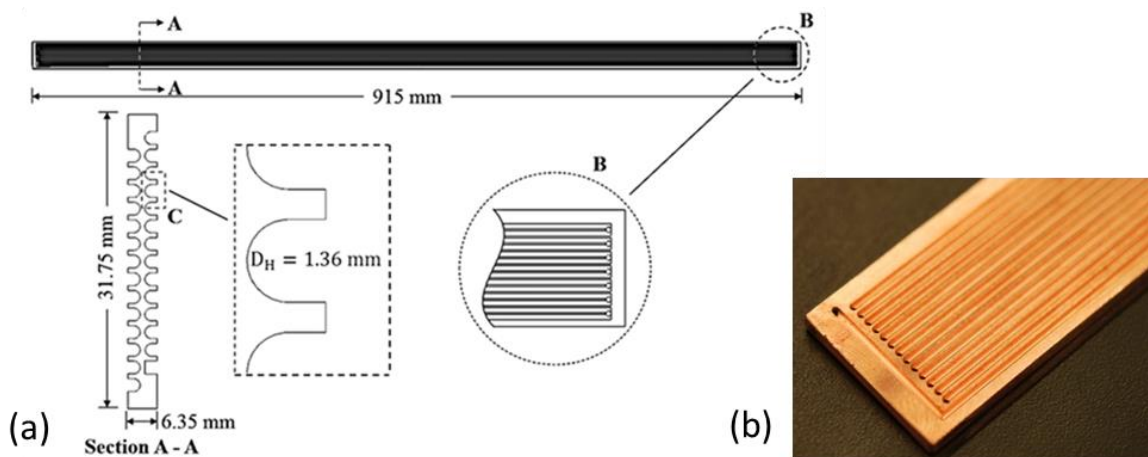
(a) Drawing of the 3D FP-OHP prototype and (b) close-up of the machined surface.
